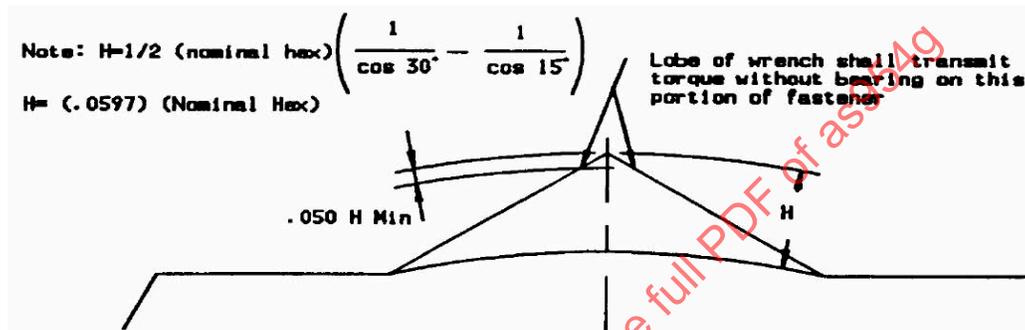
A - INTERNAL WRENCH ENGAGEMENT
